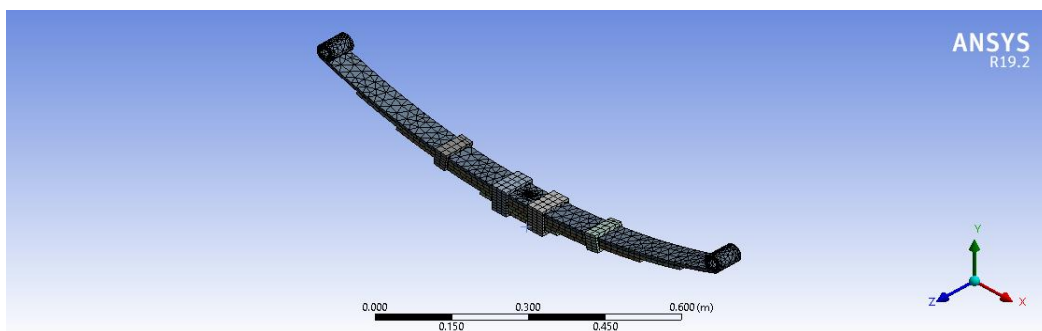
assembled figure of Leaf spring in SolidWorks
